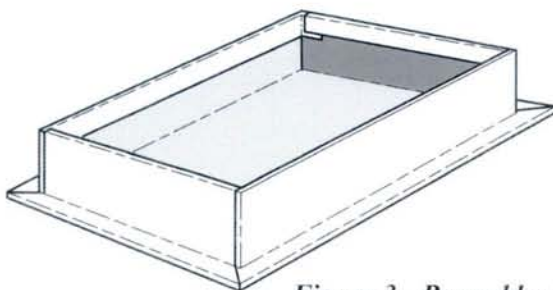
Paper blank wrapped around extended edge and panels to complete the tray.
